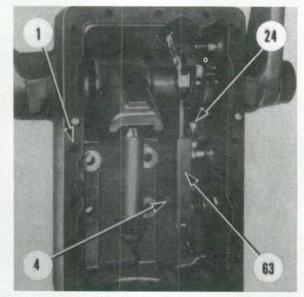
View of hydraulic lift cover with lift cylinder and control valve removed.
